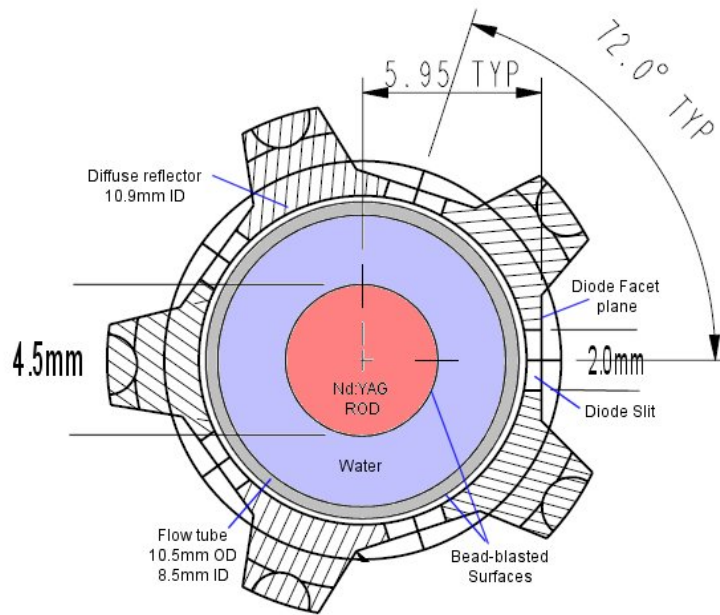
Schematic of the final pump chamber design in cross-section showing the component dimensions and 5-fold symmetry (illustrated without the laser diode assemblies).
